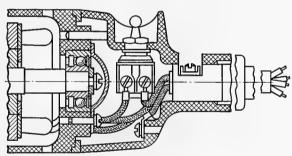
Latest design of switch arrangement for small die grinders and sanders. The toggle-operated switch unit is mounted in a dusttight compartment and a dust seal is provided where the toggle comes through the case. This type of switch does not have a release arrangement that opens it automatically.
